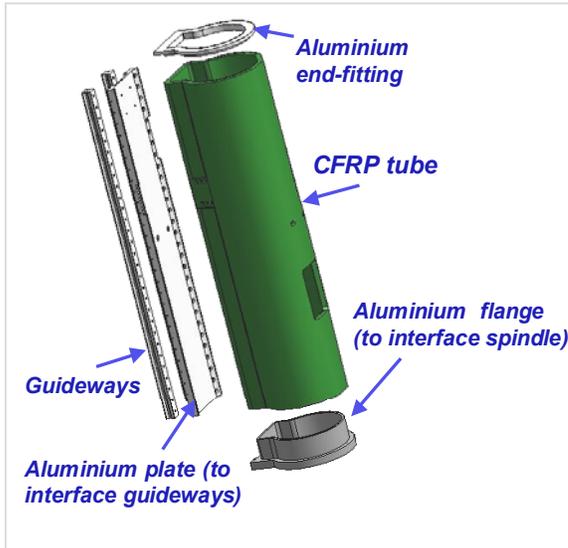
Machine tools part (ram) made in CFRP with metallic end-fittings
